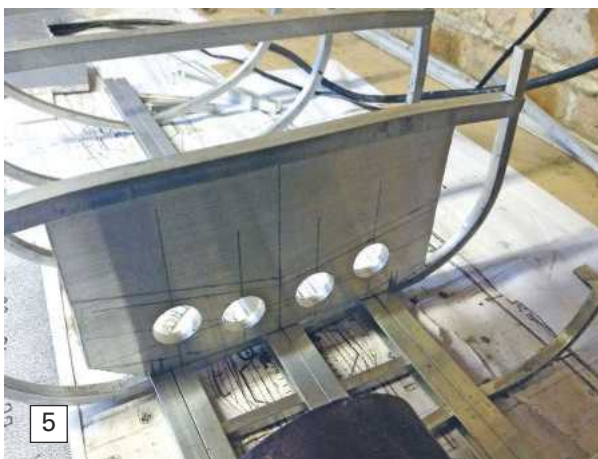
Looking aft and this is the pre-drilled plate for mounting the four miniature steam turbines.
